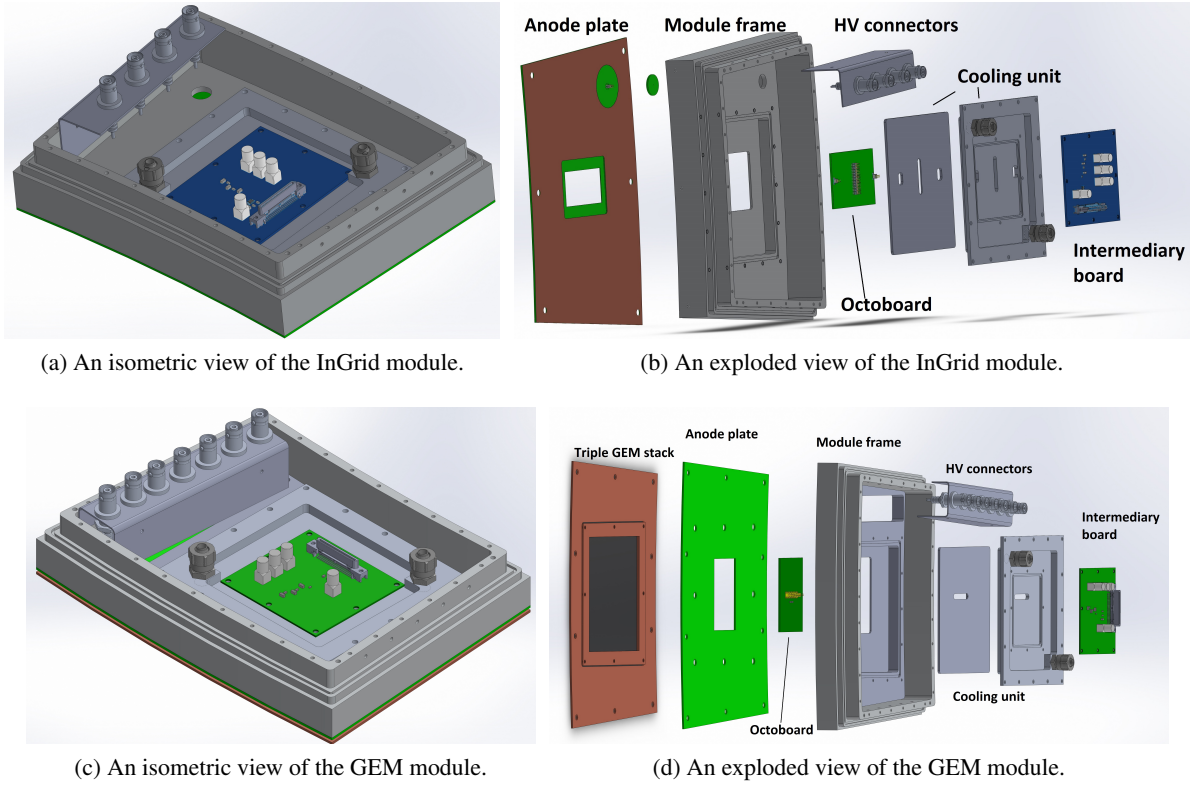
Left: Isometric views of the modules. Right: Exploded views of the modules.
